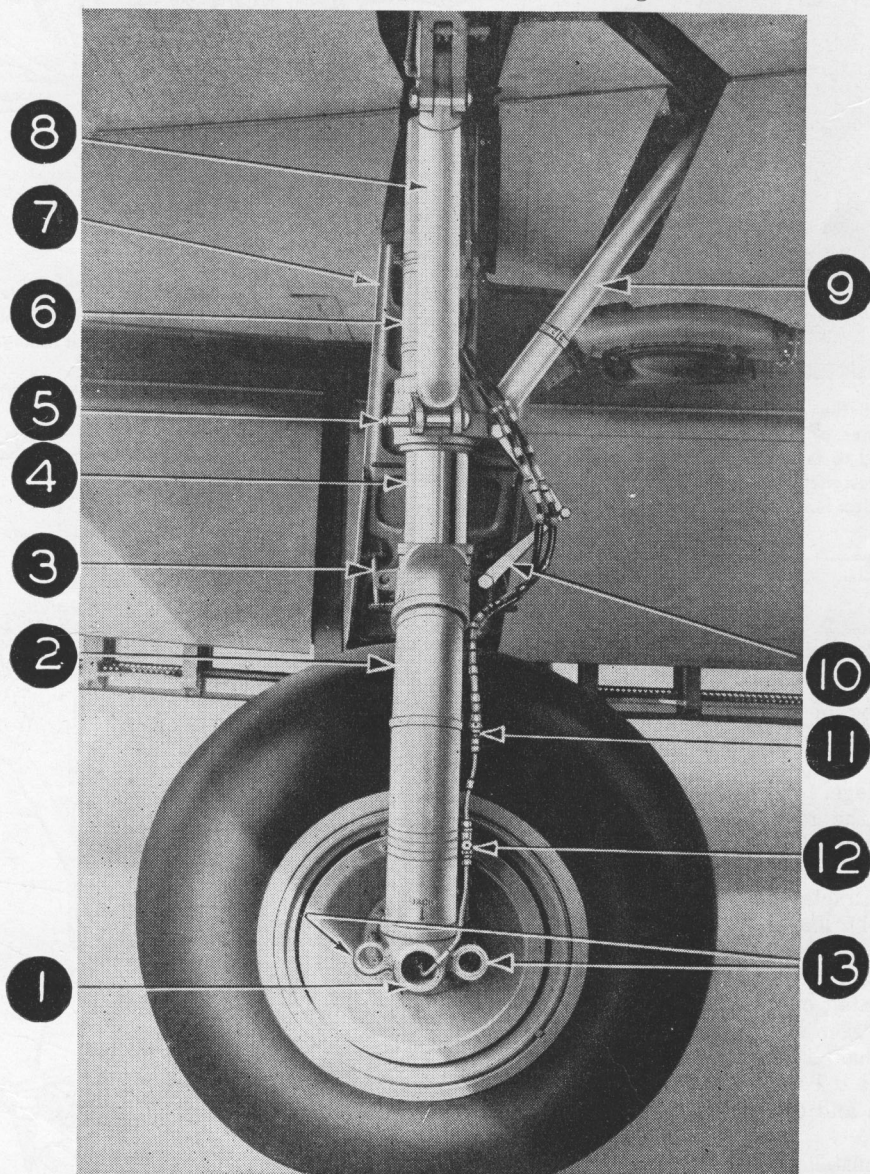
Outboard view of the main landing gear: (1) hollow axle; (2) fork tubes; (3) fairing link; (4) main oleo piston; (5) up-latch roller bolt; (6) oleo main cylinder; (7) fairing; (8) lower side brace; (9) drag brace; (10) scissors; (11) brake lines; (12) bleeder valve; (13) towing lugs. A portion of the turbosupercharger installation is seen to the right of the drag brace.
